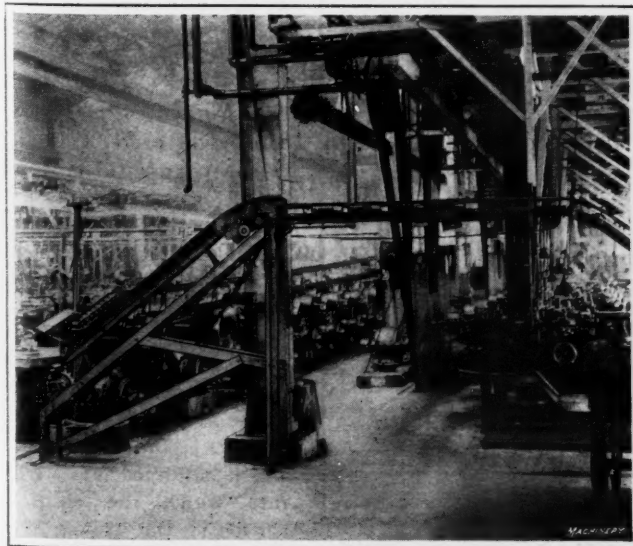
Elevating Power Conveyor carrying Shells over Passageways
